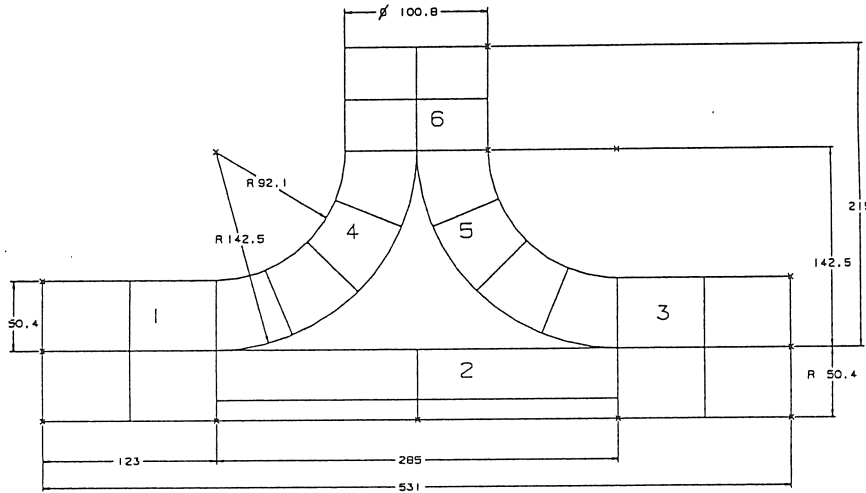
Proposed geometry of the T-connection to be filament wound.
